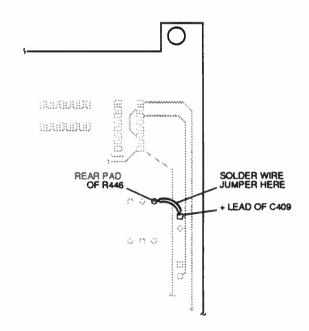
Partial simplified view of the channel B Display Board (circuit trace side). Solder an insulated jumper wire from the R446 (rear) pad to the C409 (+) pad.
